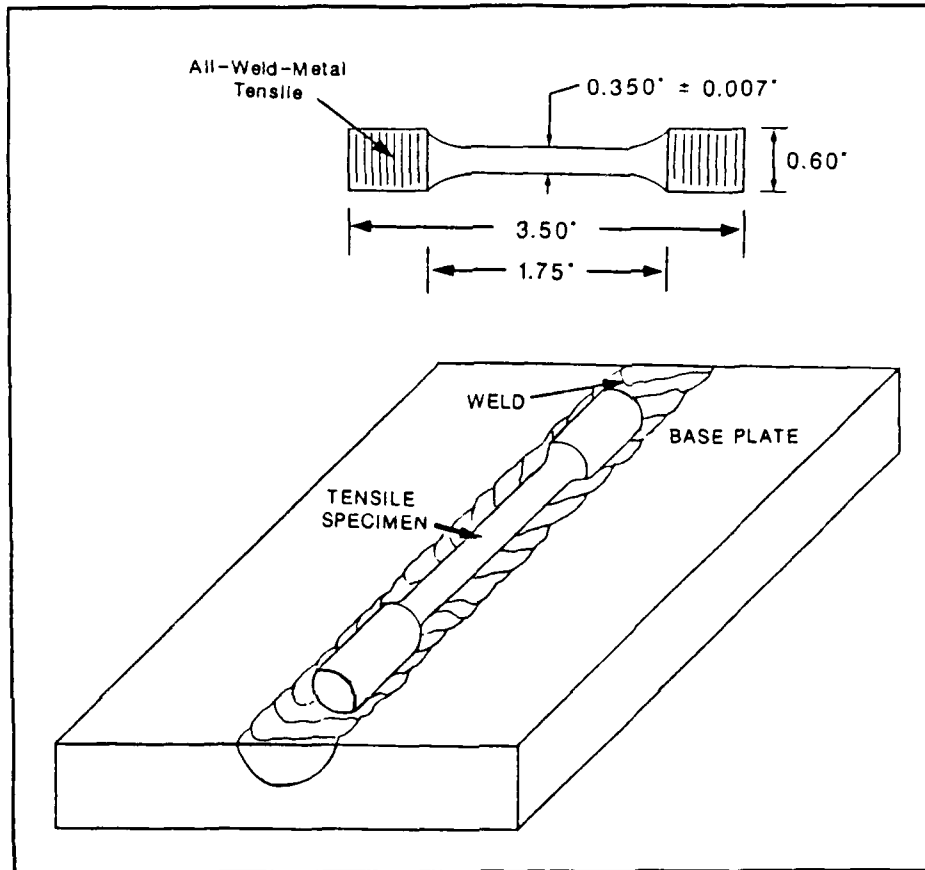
Subsized all-weld-metal tensile specimens used in this investigation.
